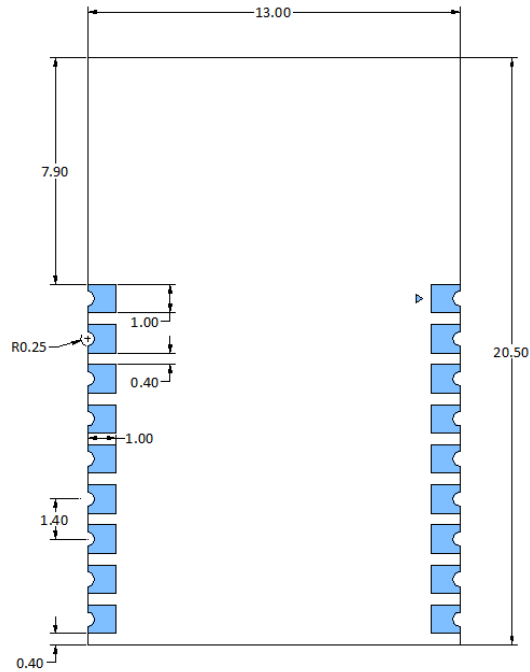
Overall Dimensions of BDE-BLEM203D (BOTTOM VIEW)
